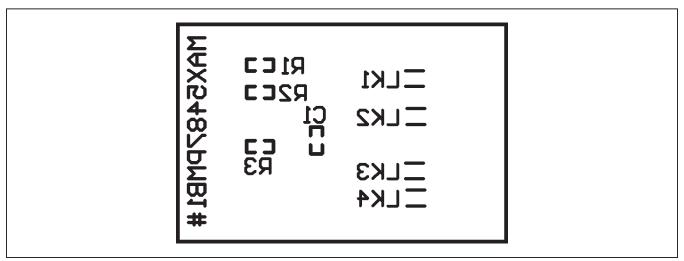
MAX5487PMB1 Peripheral Module Component Placement Guide—Solder Side
